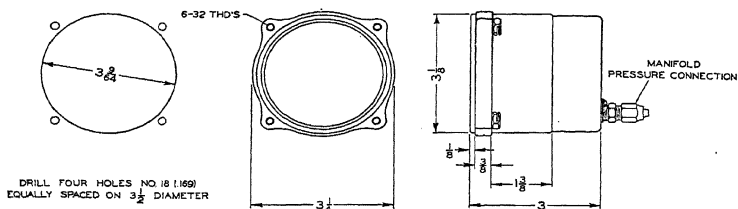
KOLLSMAN MANIFOLD PRESSURE GAUGE
